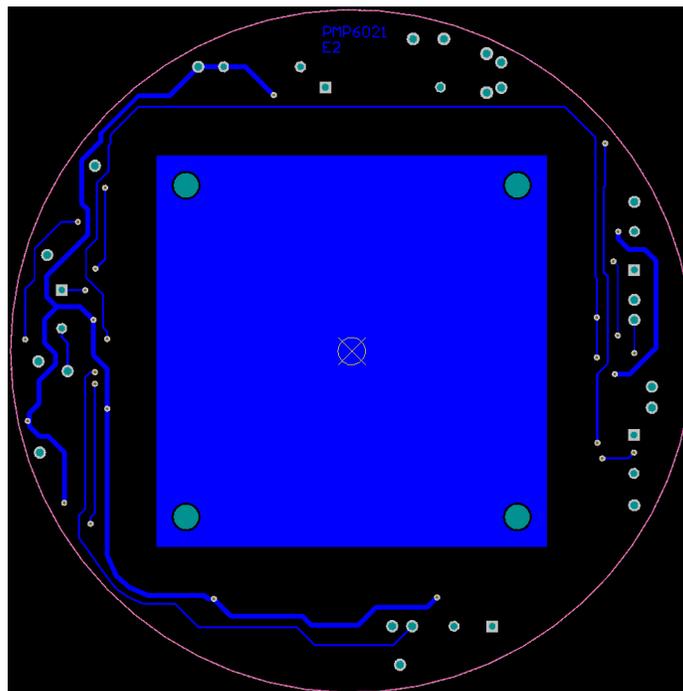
Bottom Layer and Bottom Overlay (Bottom view)
